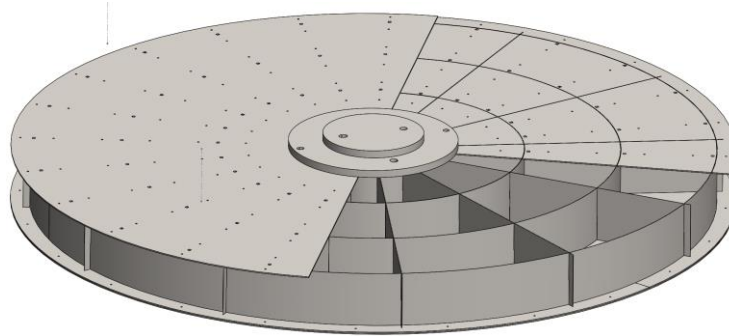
Assembled prototype of rotor wheel face of 750 kW machine.
